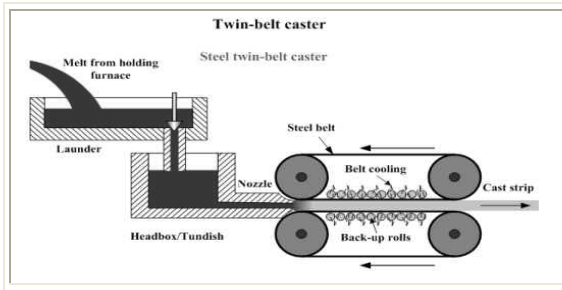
Horizontal withdrawing Installation equipped with steel strips
